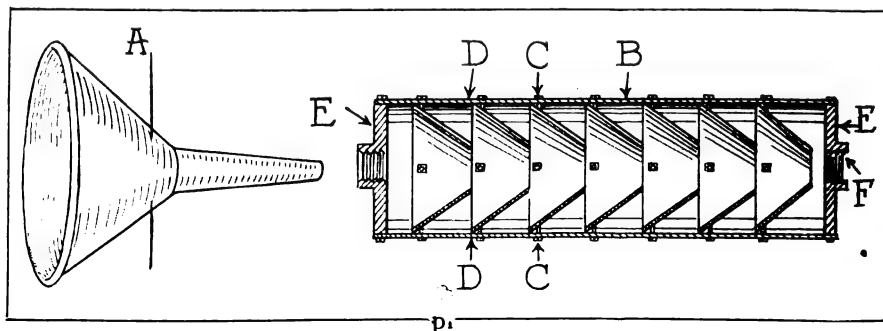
Muffler Constructed of Stove Pipe and Funnels: A, the Funnel Marked for Cutting; B, a Cross-section of the Assembly.
